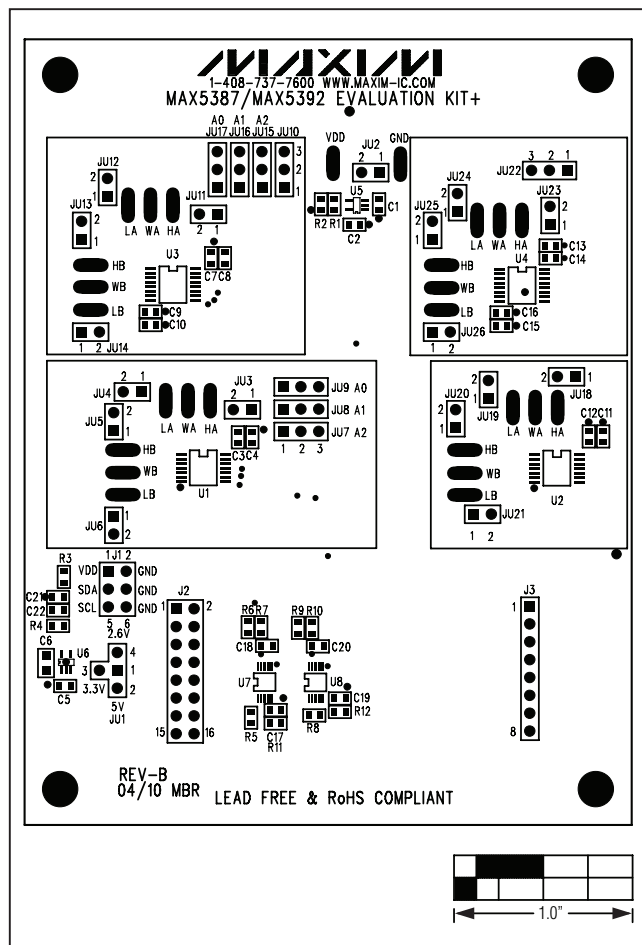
MAX5387 EV Kit Component Placement Guide—Component Side
